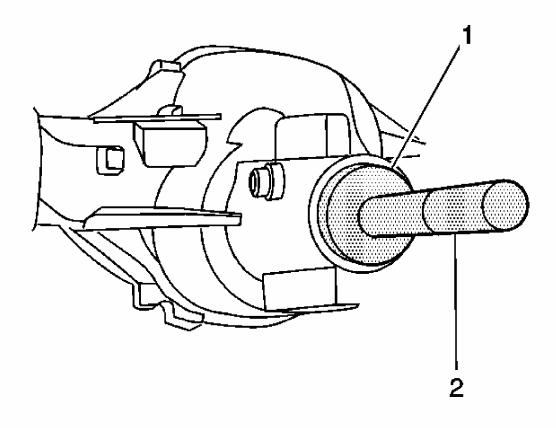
Installing Outer Pinion Bearing Cup Courtesy of GENERAL MOTORS CORP.
